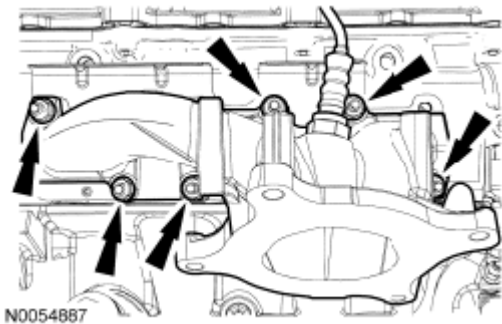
Locating Exhaust Manifold Gasket & Nut
